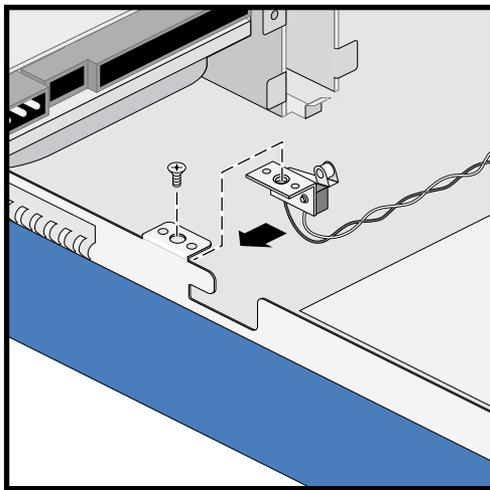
Installing the Intrusion Alert Microswitch Cable Module
